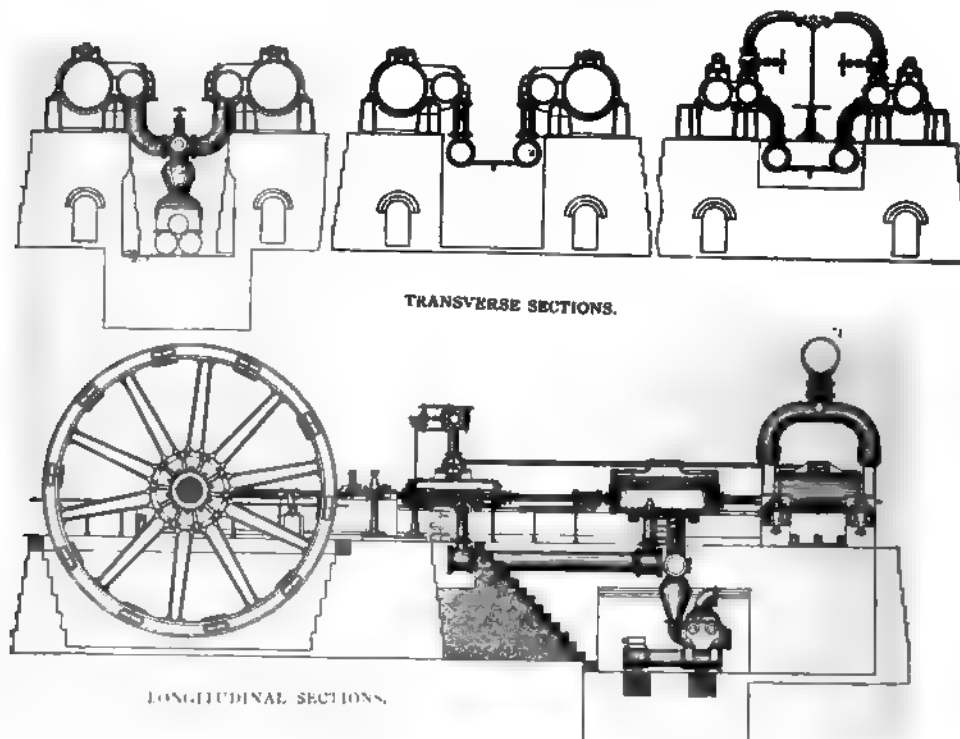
COMPOUND CONDENSING BESSEMER BLOWING ENGINE.
